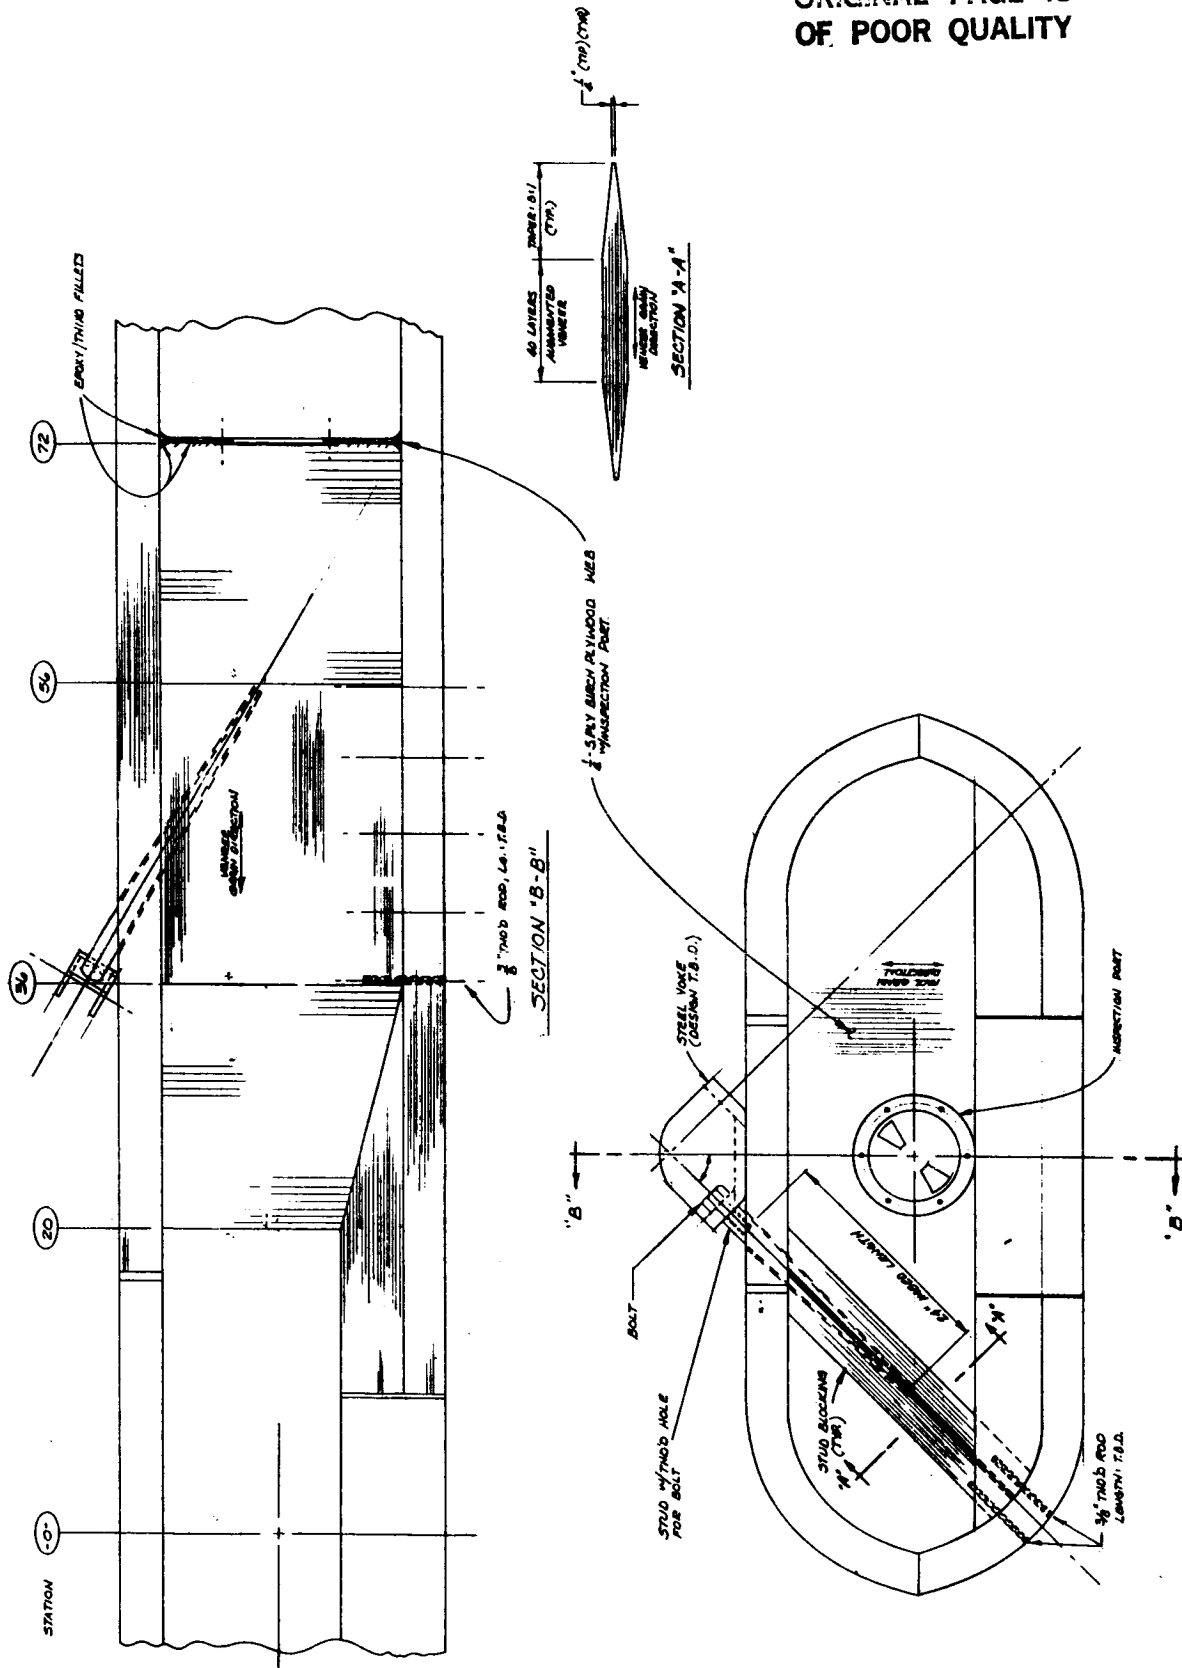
Load Take-Off for Hydraulic Teeter Dampers
